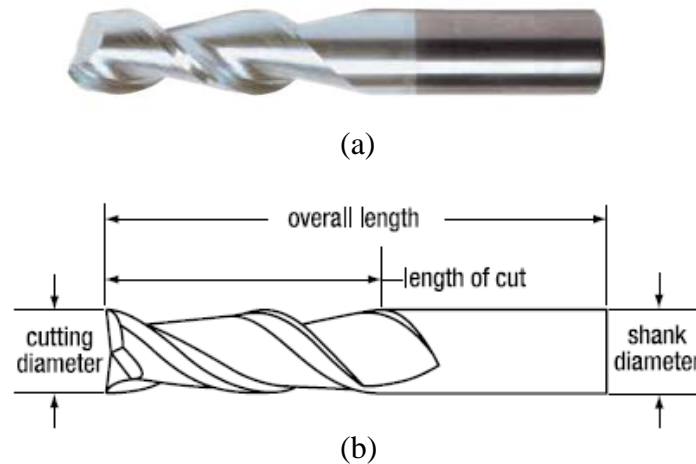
End mill cutter: (a) Cutter picture. (b) Cutter dimensions.
